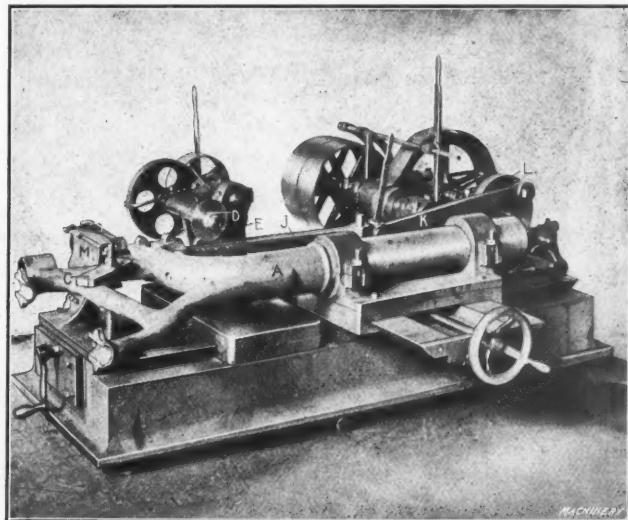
Special Machine for milling and broaching Upright Drill Spindle Columns
